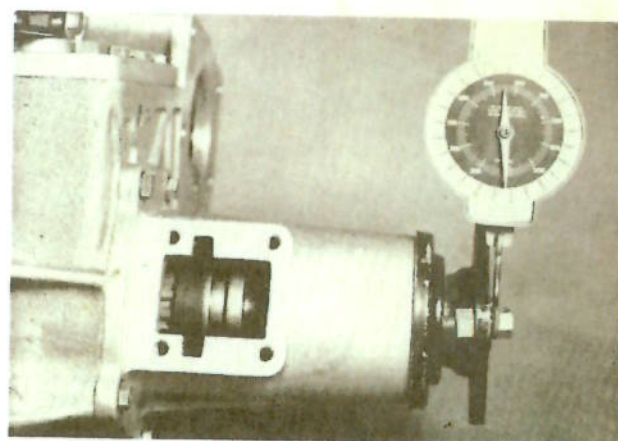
MEASURING THE TAPERED ROLLER BEARING PRELOAD.
